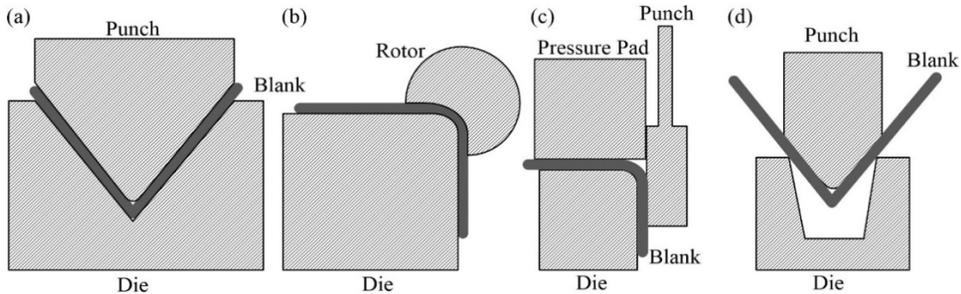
Bending processes for the sheet metals. (a) V-bending, (b) Rotary bending, (c) Edge bending, and (d) Air bending.
